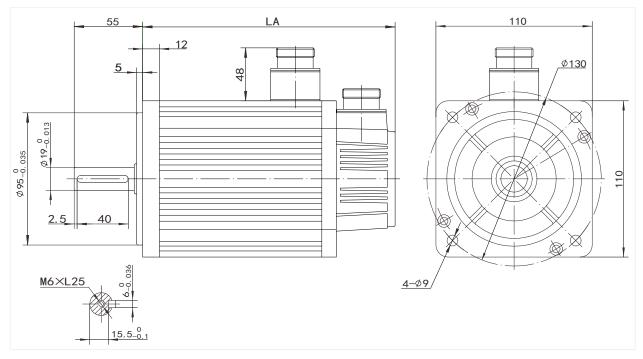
Installation dimension of WE series 110 flange servo motor
